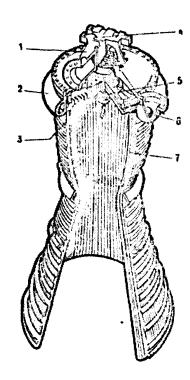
Tubular Chamber of Liquid Rocket Engine: 1 -- oxidizer feed pipe; 2 -- fuel feed collector; 3 -- mixing head; 4 -- gimbal suspension; 5 -- ignition device; 6 -- fuel feed pipe; 7 -- tubular body of chamber
